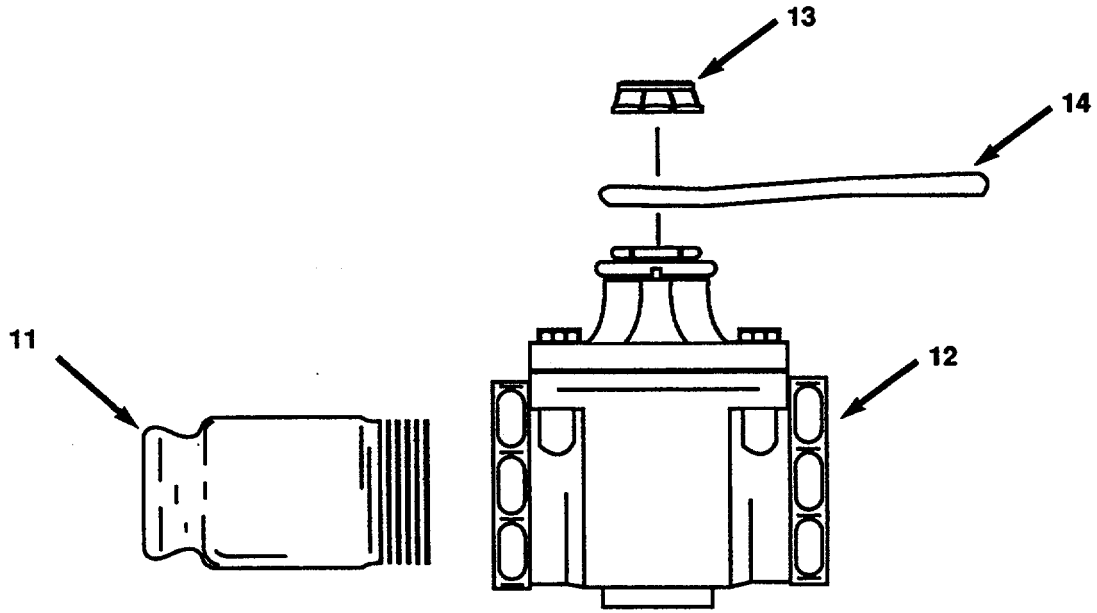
Drain Assembly and Ball Valve (Sheet 2 of 2)
